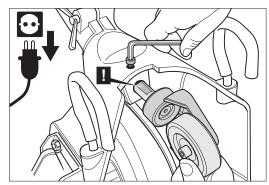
Tilt the machine forwards over the bracket and release the holding screw. When mounting, align the tensioning surface of the tail axle towards the screw. Ensure that the machine is standing securely!
